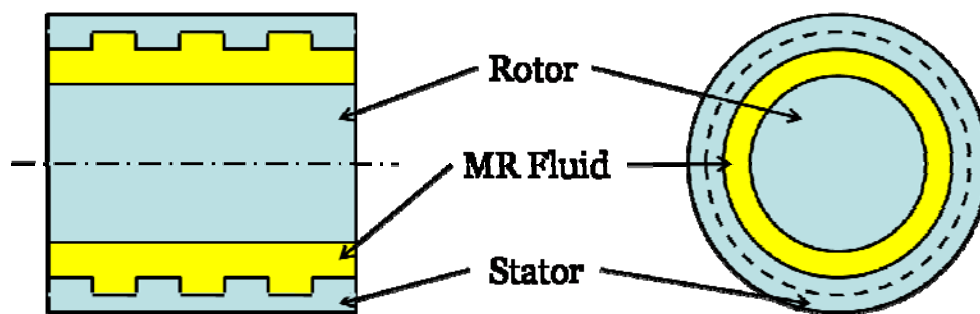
Cross-sectional and Side Views of Non-linear Damper
